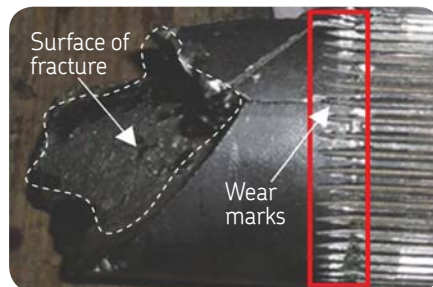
An axle shaft breakdown with visible wear marks from bending, due to repeatedly transporting a too heavy load in the bucket.
